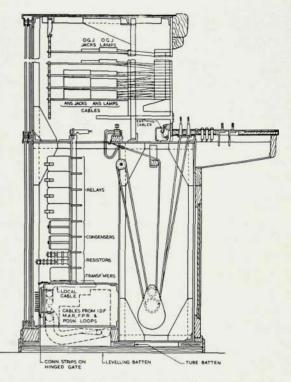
Sectional View of a Switchboard Position Showing Construction and Interior Equipment Layout
